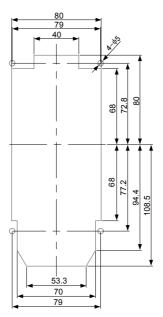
Sheet metal slot dimensions (unit: mm)
